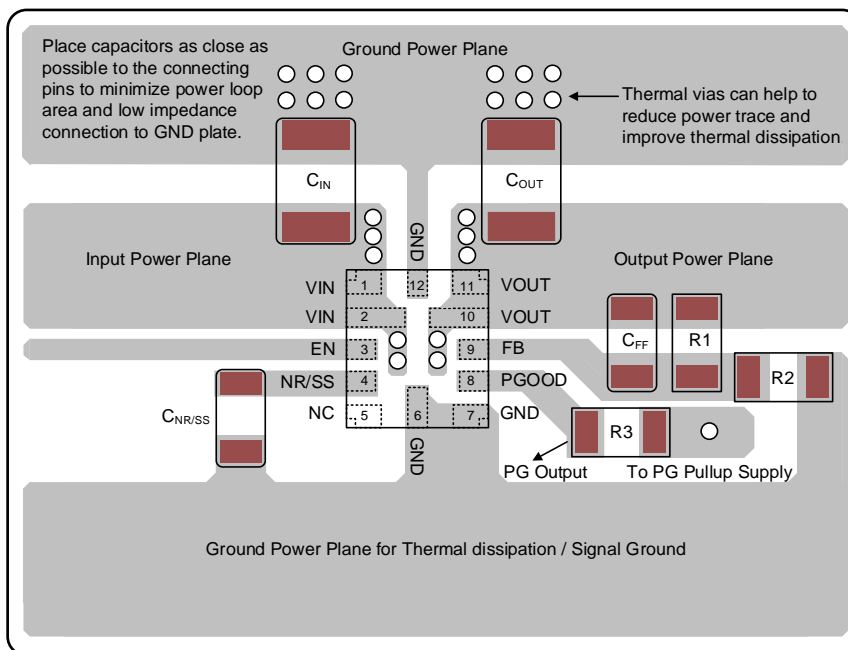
PCB Layout Guide for WQFN-12L 2.2x2.5 (FC) package
